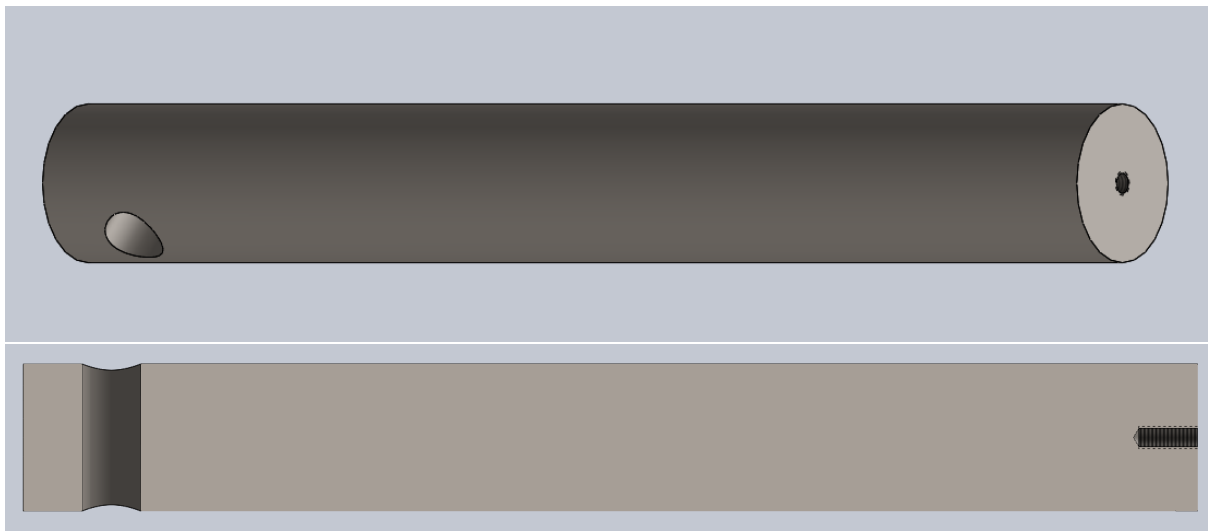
CAD model for the threaded grip. Full model (top) and cross section view showing depth of UNF 10-32 threaded hole (bottom)
